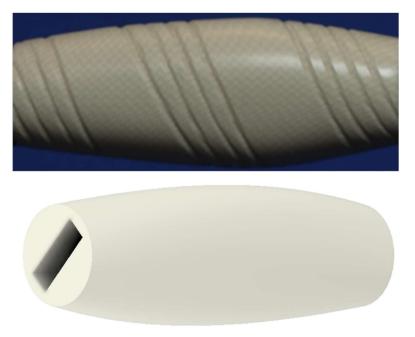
Grip CAD (Bottom), Final Grip (Top)
